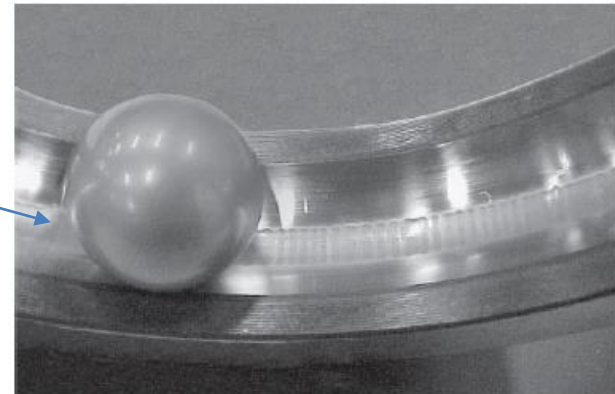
Bearing currents can cause “bearing fluting”, a rhythmic pattern on the bearing’s races.
